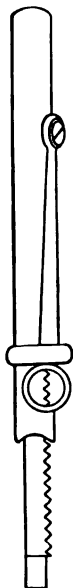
RACK AND PINION EXTENSION JOINT.
